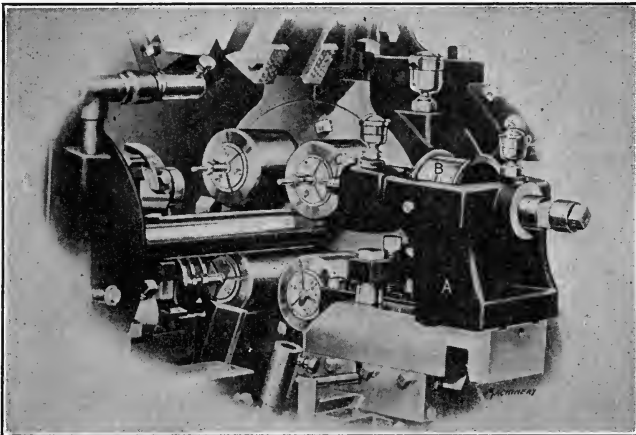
Cross-drilling Attachment held on Cut-off Tool-slide of Acme Multiple-spindle Automatic
